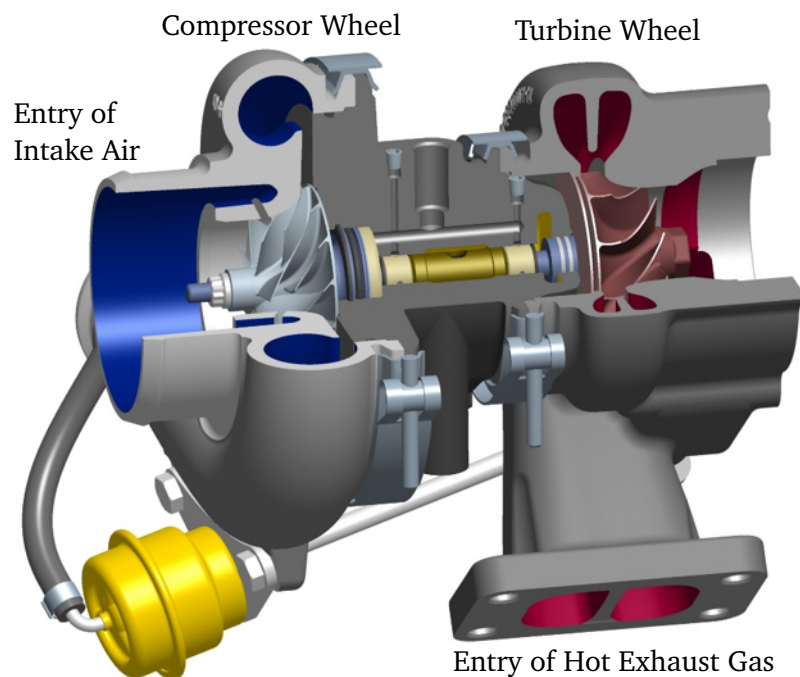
Cross-section of an automotive exhaust turbocharger with full-floating ring bearings
